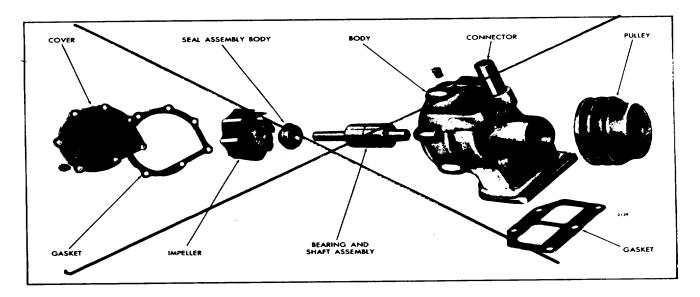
Fresh Water Pump Details and Relative Location of Parts
